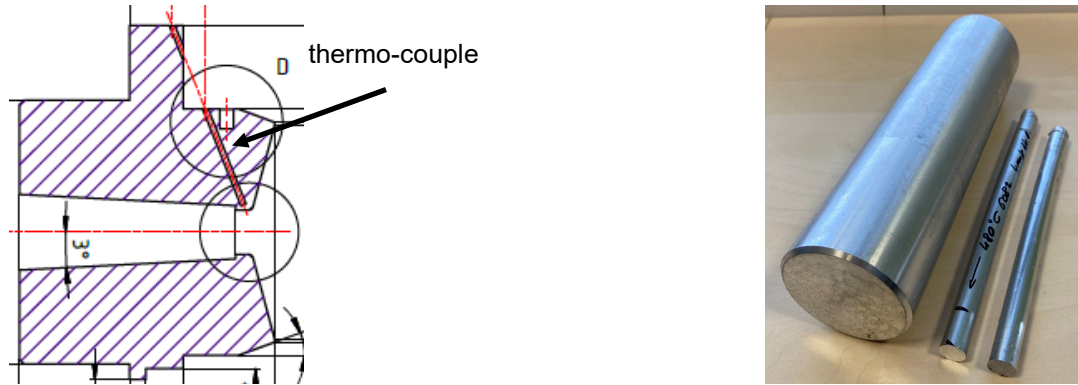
(left) benchmark tool, (right) billet and extrudate.
